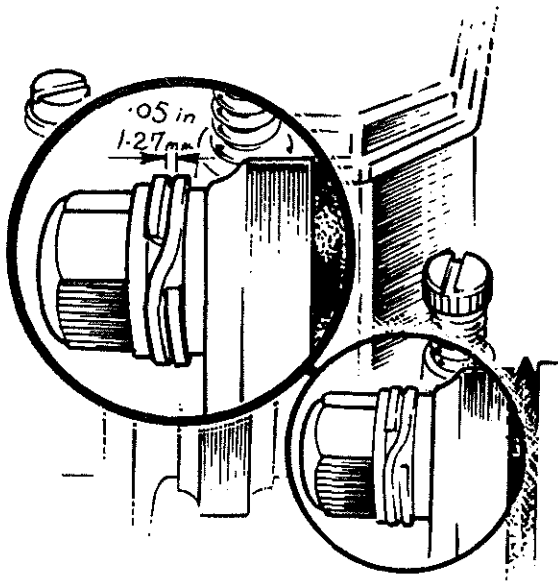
DOUBLE COIL SPRING WASHER CLEARANCE (WEBER)
